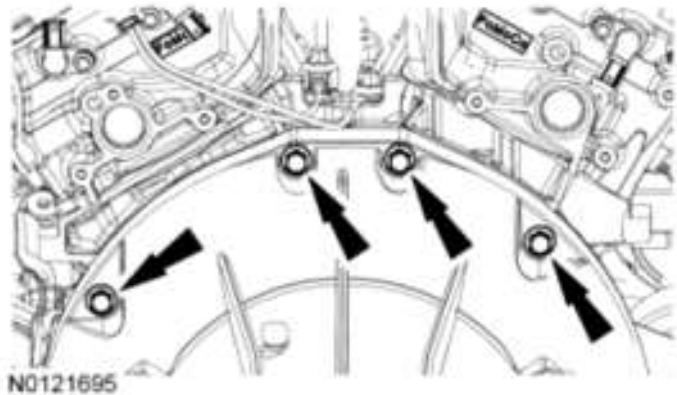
Locating Upper Bellhousing-To-Engine Bolts
